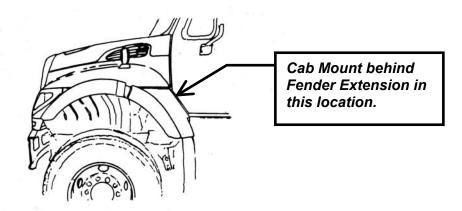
Front Cab Mount Bolt Location (7000 Series shown, 8000 Series location is same)
